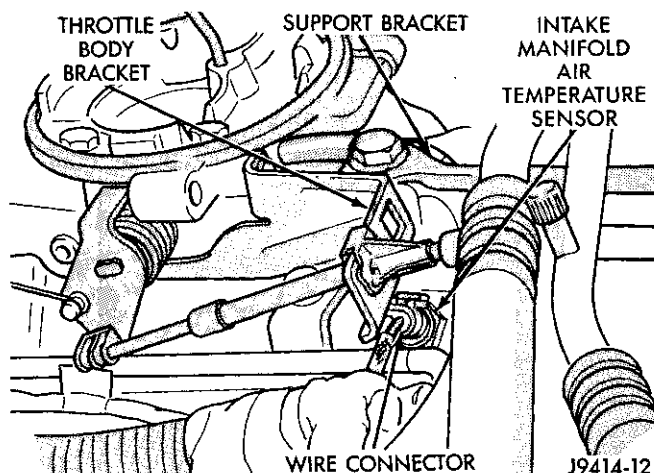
Air Temperature Sensor—3.9L (V-6) Engine
